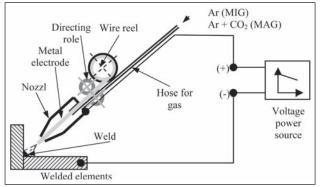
Draft of metal inert gas (MIG) and metal active gas (MAG) welding [2]
